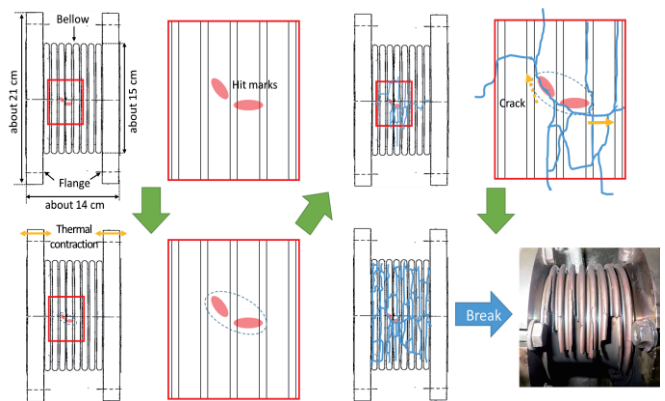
Mechanism of breakage of the exhaust pipe expansion joint
